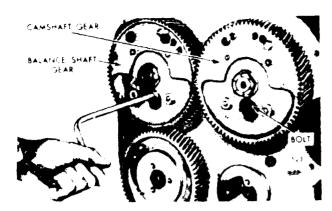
B-151. Removing or Installing Shaft Bearing Retainer Bolts
